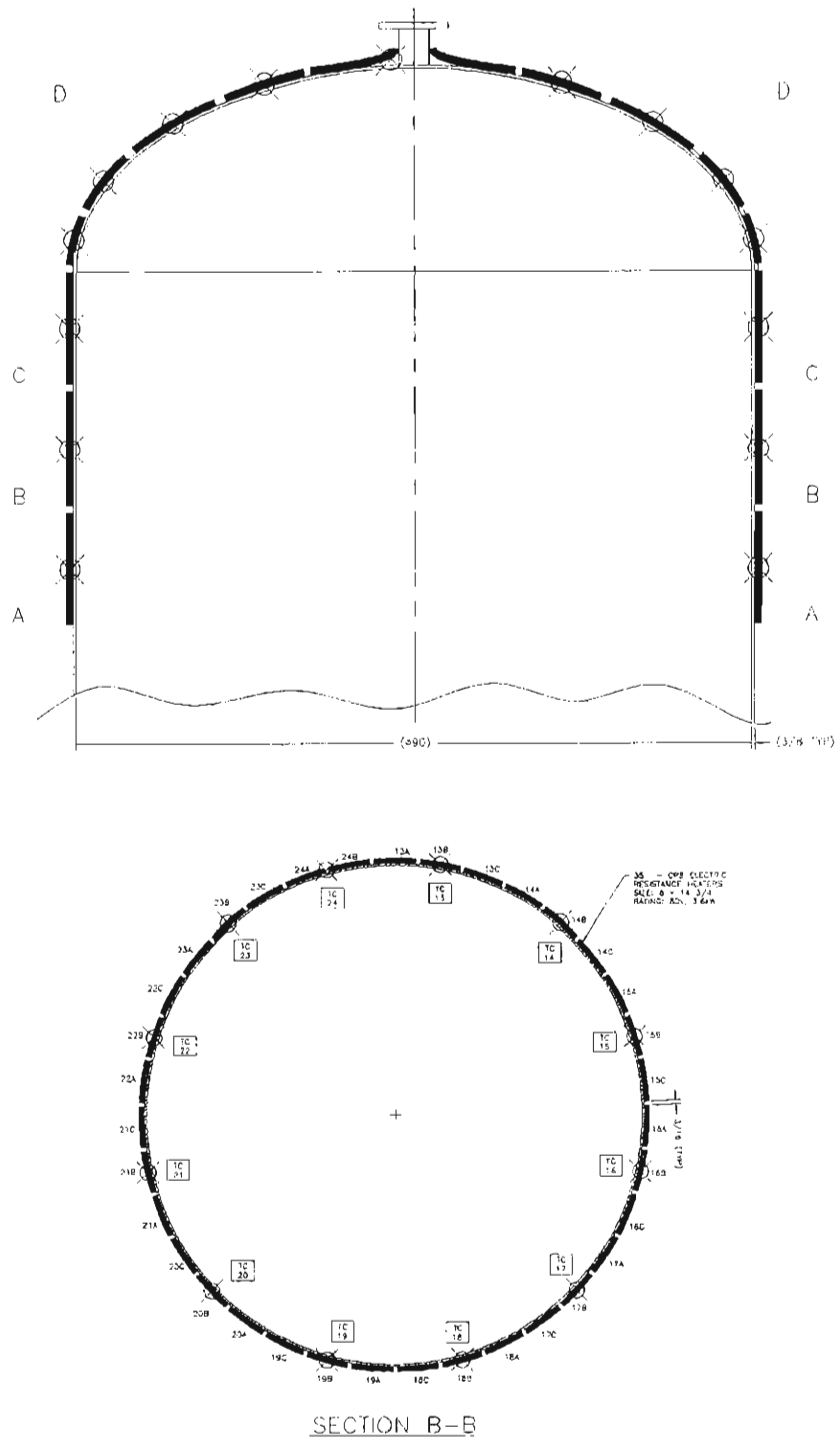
Heater and thermocouple layout for case history described in section 17.1.2 in which electric resistance heating was used to PWHT base metal shell repairs and a head nozzle attachment to a cylindrical refinery vessel.
